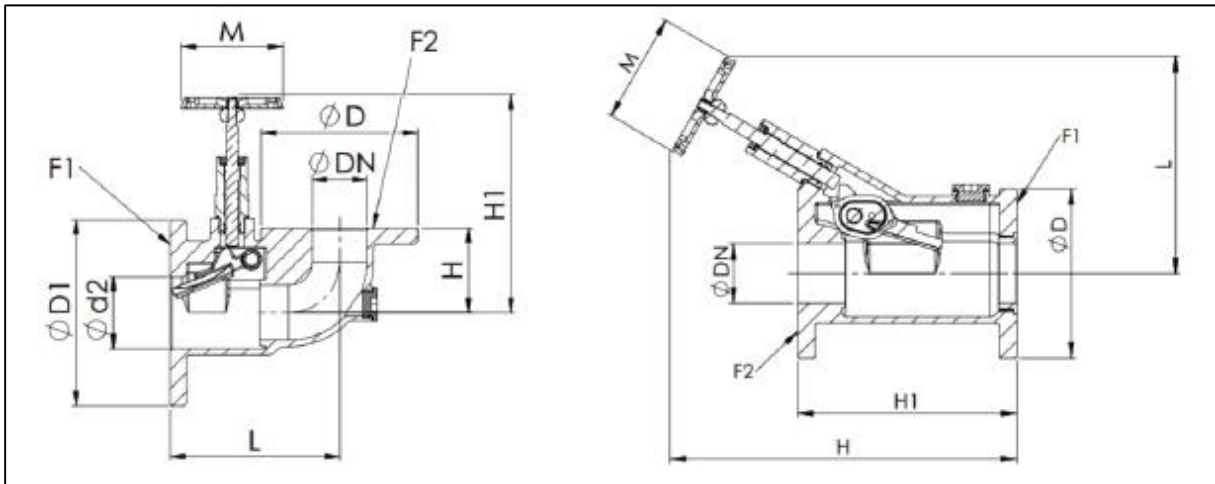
To the left, Storm valve angle dimension reference sketch. To the right, storm valve straight dimension reference sketch.
